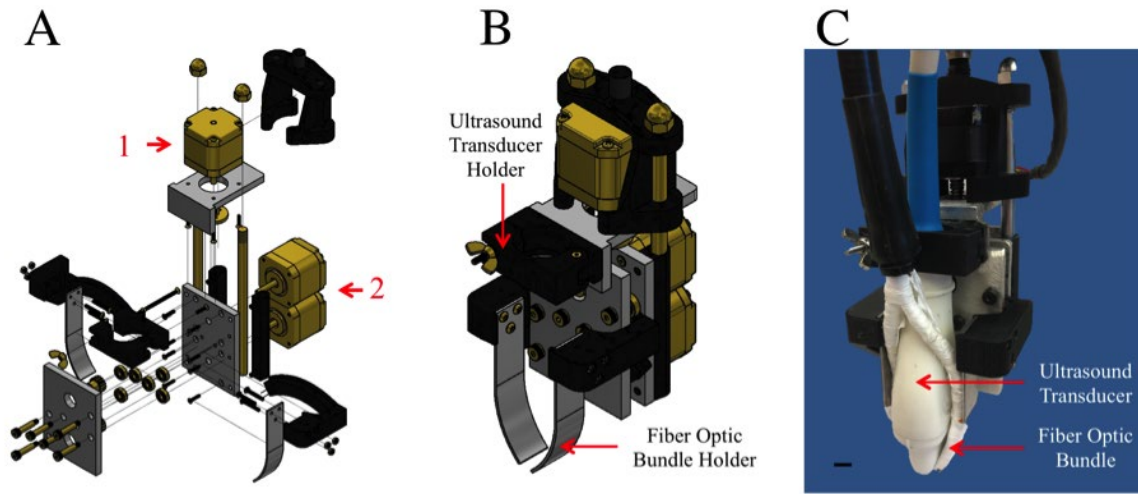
Exploded (A), presentation (B), and constructed (C) images of the PAT holder. Fabricated parts shown in silver, 3D printed parts shown in black, and commercially available parts shown in gold. PAT holder specifically consists of motors for translation of ultrasound transducer (1), and rotation of fiber optic bundles (2). Scale bar represents 1 cm.
